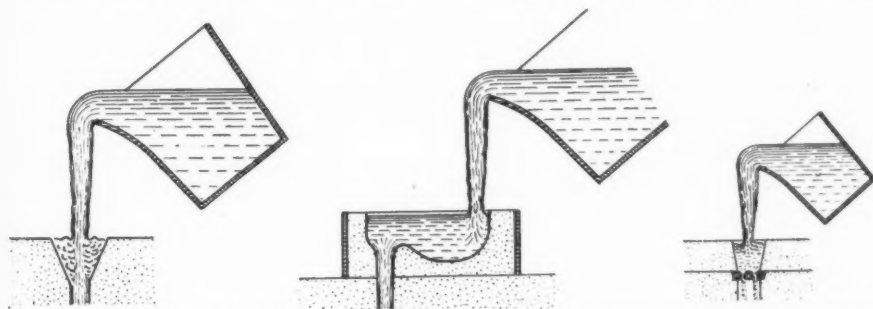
(Left) Tilting ladle pouring directly into the runner. (Center) Tilting ladle pouring into a runner basin. (Right) Tilting ladle pouring through a filter core.
